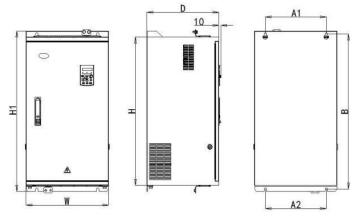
160W~400kW External Dimensions and Installation Dimension Schematic
